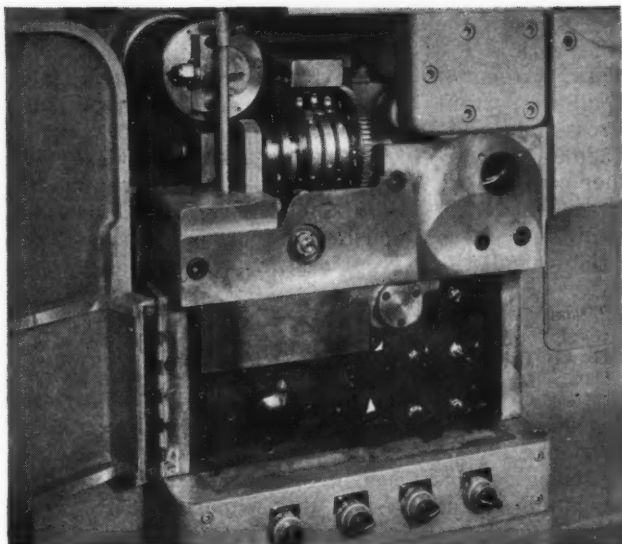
Automatic Feed Controls of Precision Small-bore Grinding Machine Shown in Fig. 1
